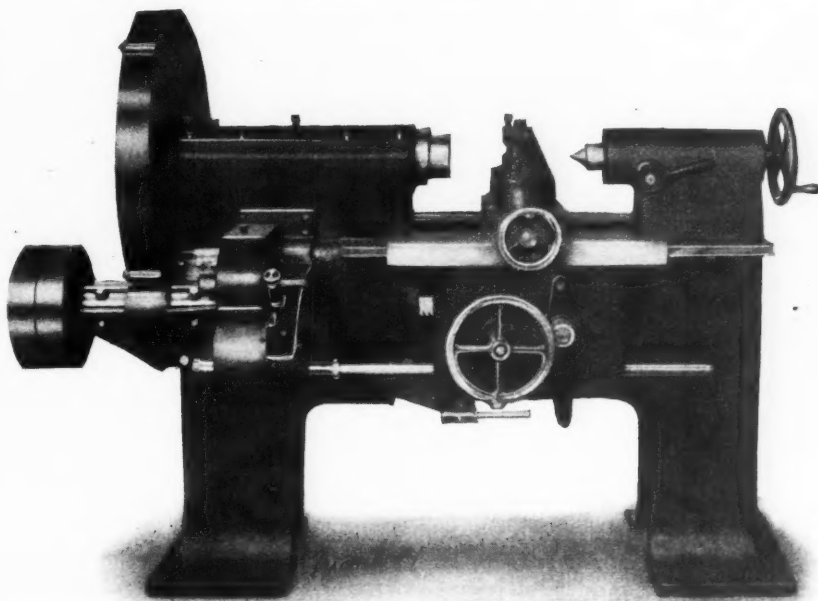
Lathe for machining 3-inch Shells, built by Pottstown Machine Co.
